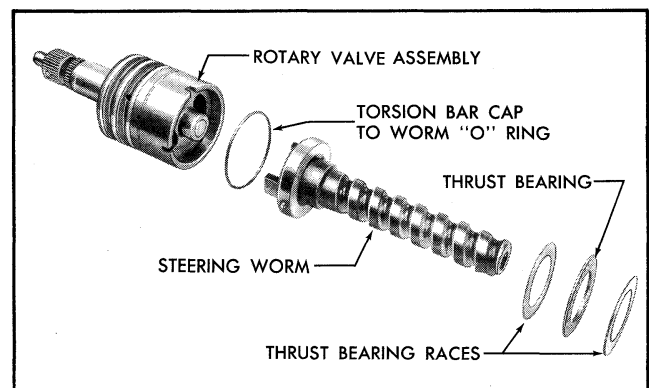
A-29 Worm Shaft and Rotary Valve - Exploded View
